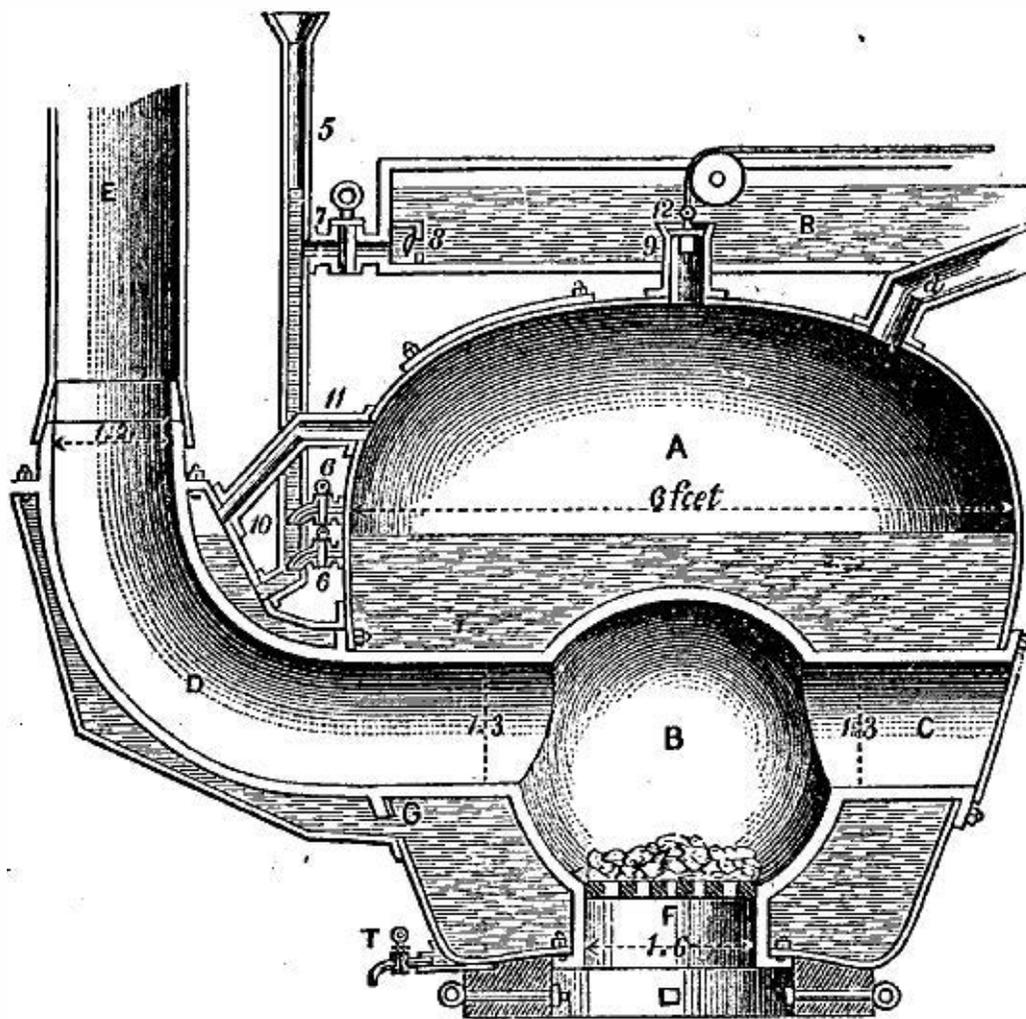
Smeaton's Portable-Engine Boiler, 1765.
